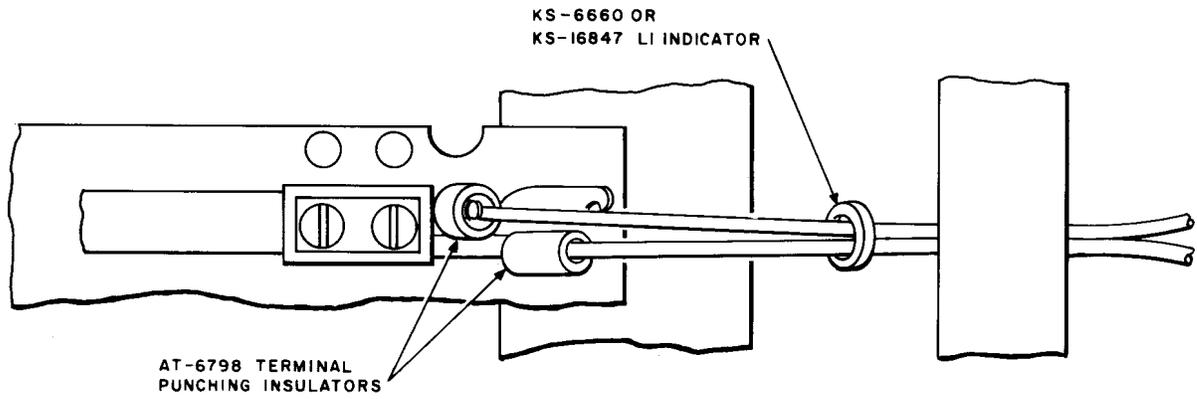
Indicator and Terminal Punching Insulators on Protector Mounting
